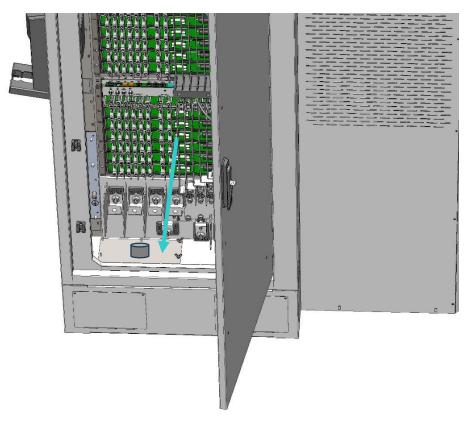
Placement of Removable Plate inside bottom of charger (optional Cable Gland not shown)
